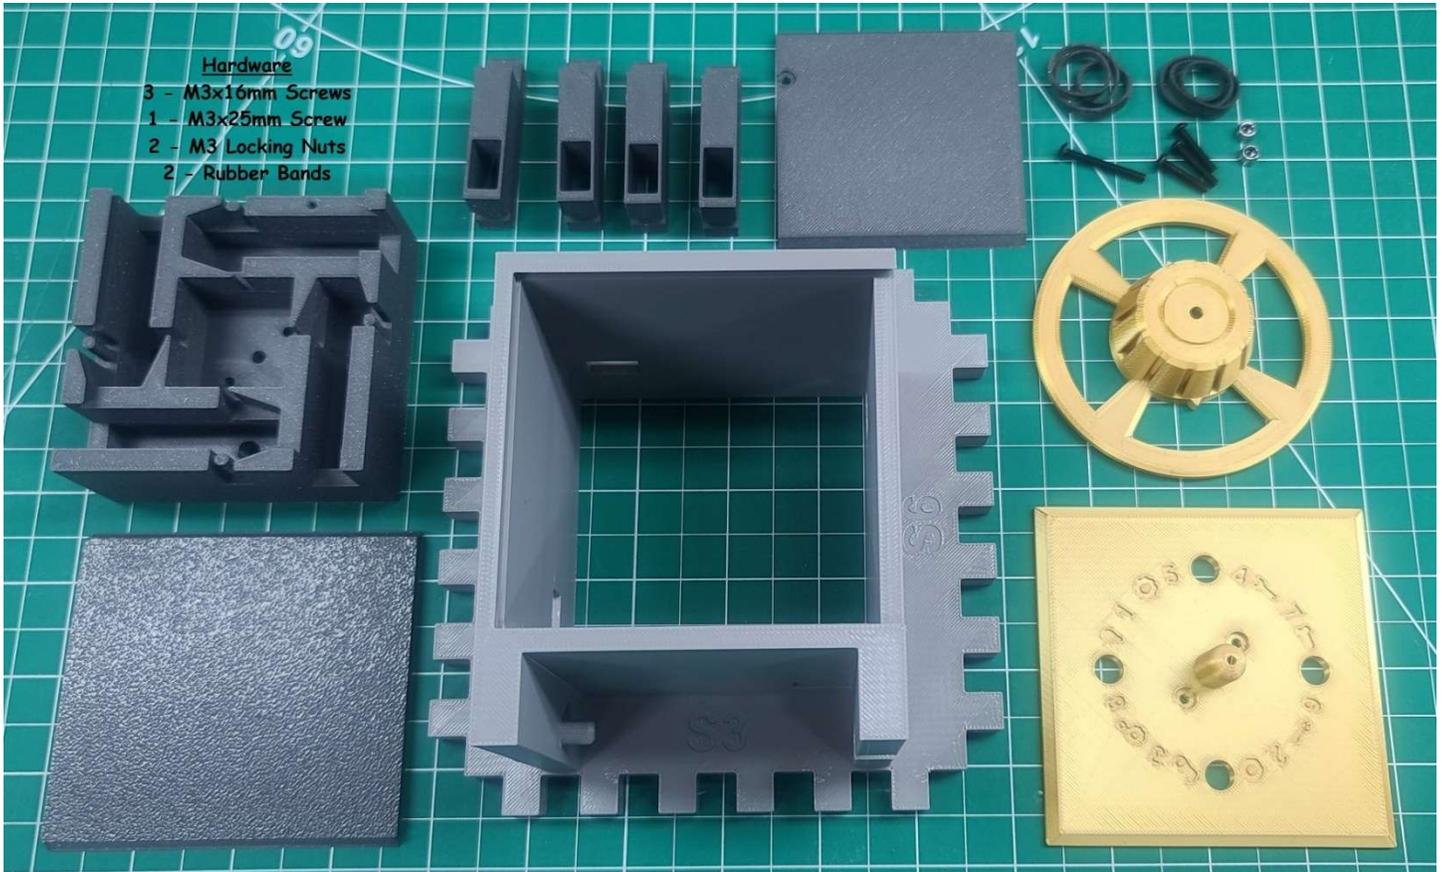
Side 2 Printed Parts and Misc. Hardware
